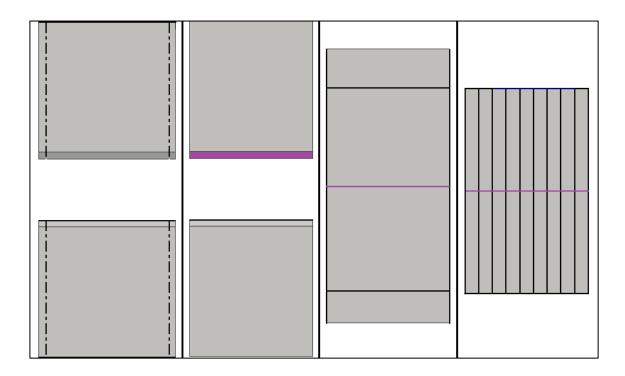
Cutting of the test samples from hot pressed veneer sheets.
